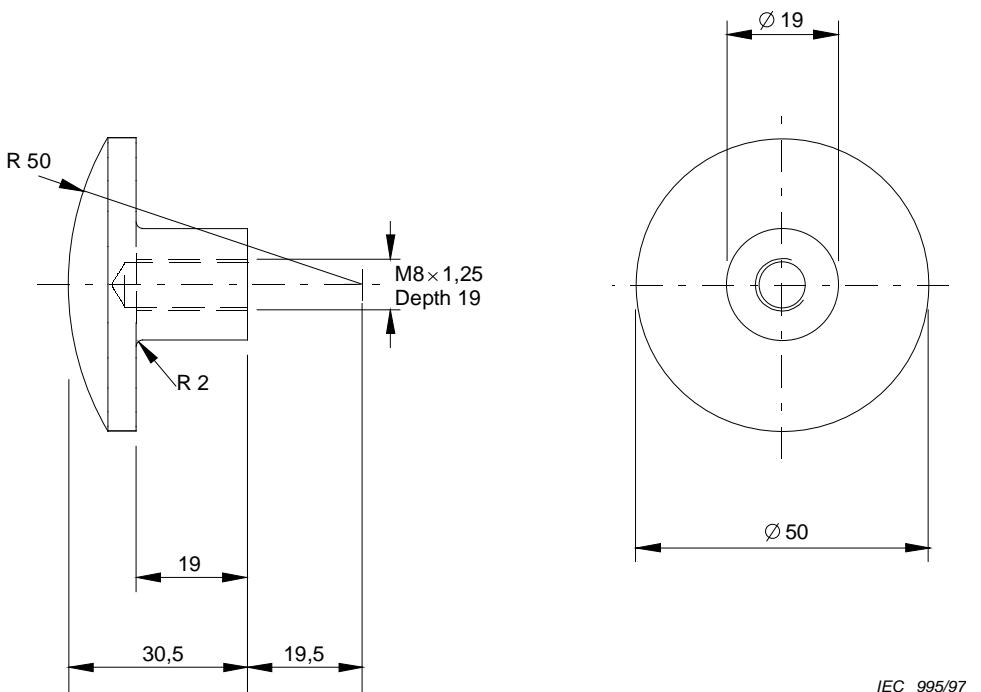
Impact test fixture – Pendulum masses – Quantity: 4
